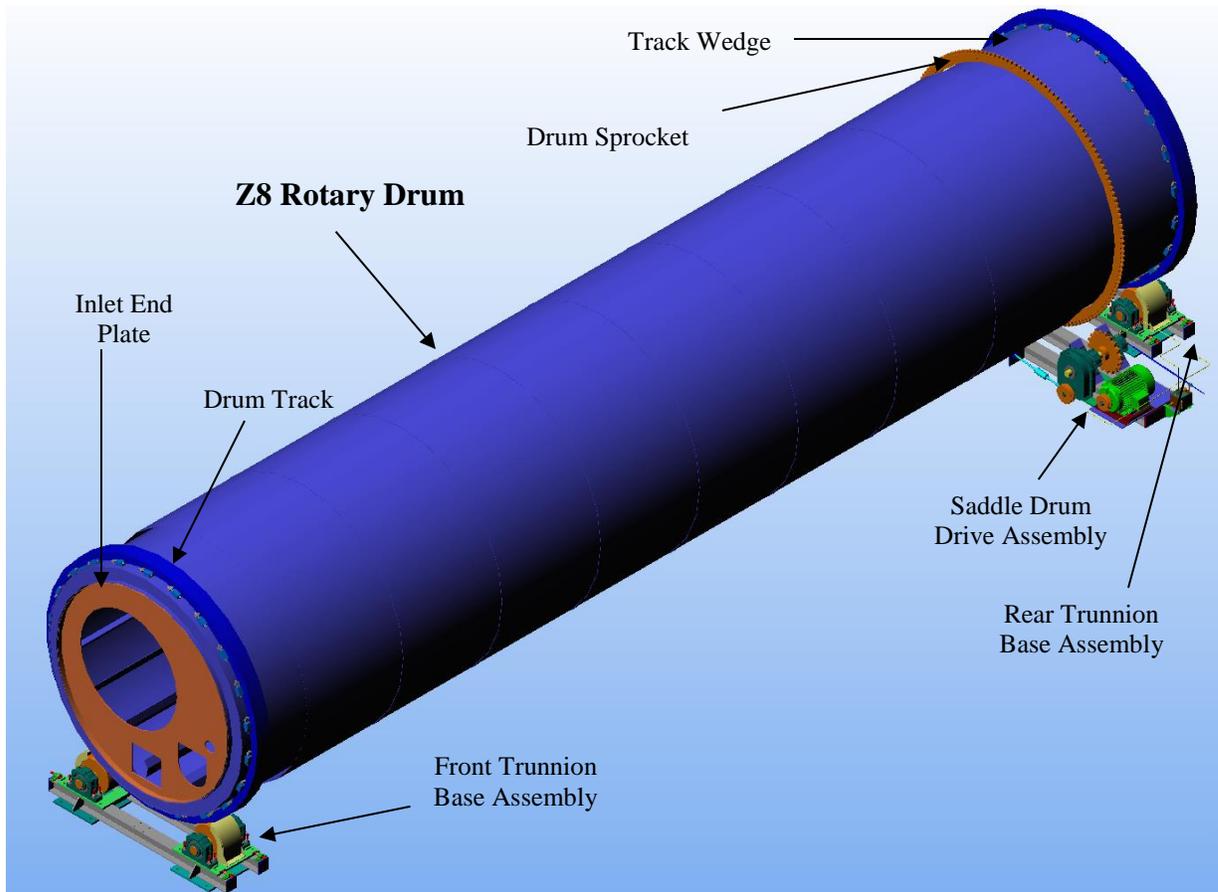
Rotary Dryer System (Drive Chain and Drive belts not shown)
